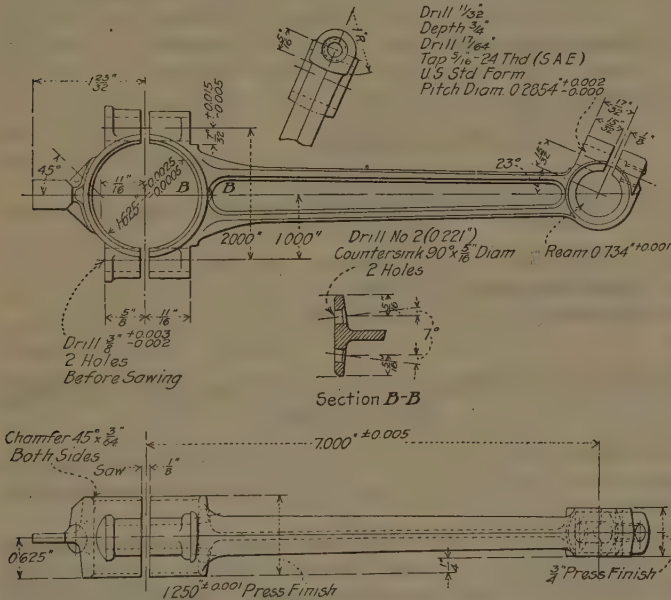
DROP-FORGED AUTOMOBILE CONNECTING ROD, THE MACHINING OPERATIONS ON WHICH ARE ANALYZED
